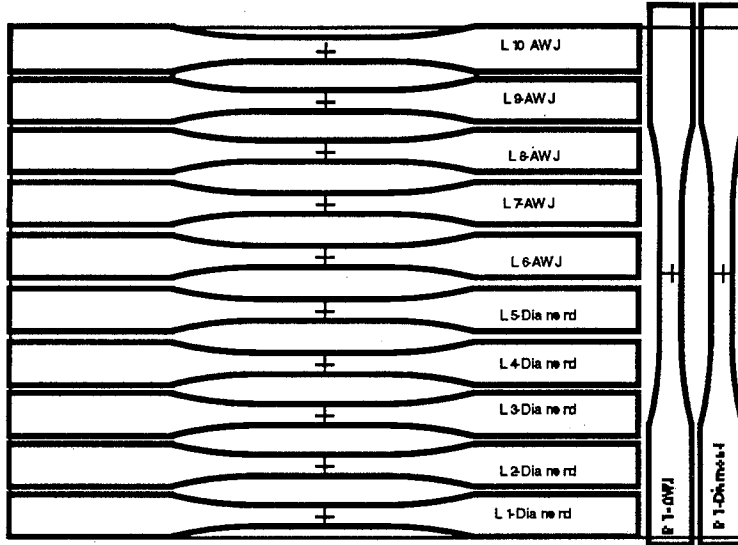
Layout of specimens to be cut from plate for diamond-grit cutting/grinding and AWJ cutting. Note: L specimens are ~175 mm in length and B specimens are ~150 mm in length.
